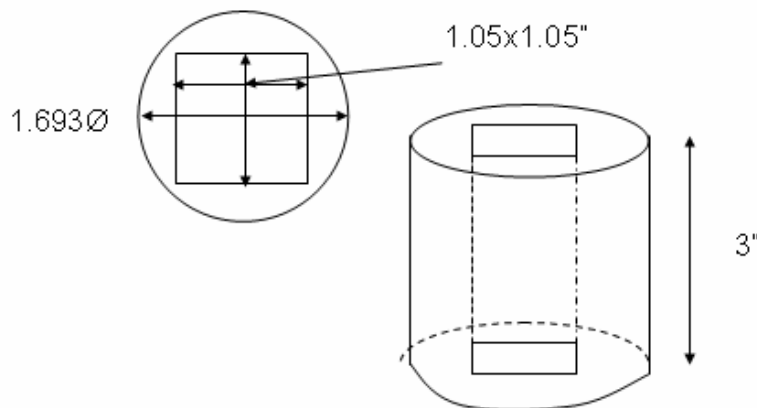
Aluminum sleeve to hold can upright inside quartz tube during degassing and sealing.
